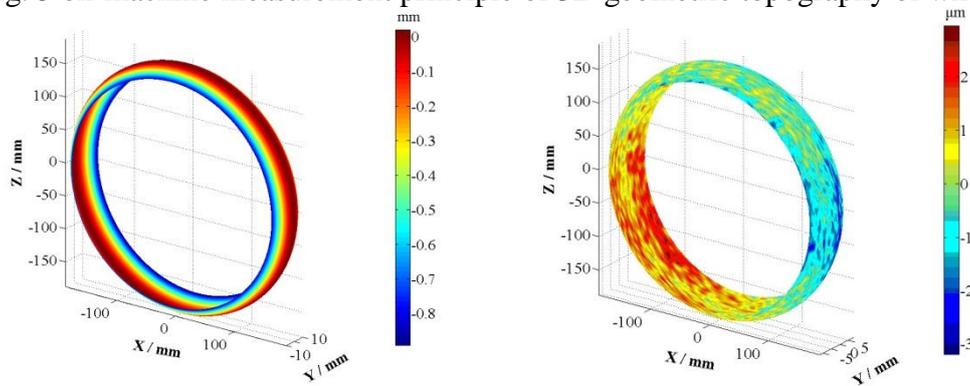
3D geometric topography (left) and form error (right) of arc wheel
